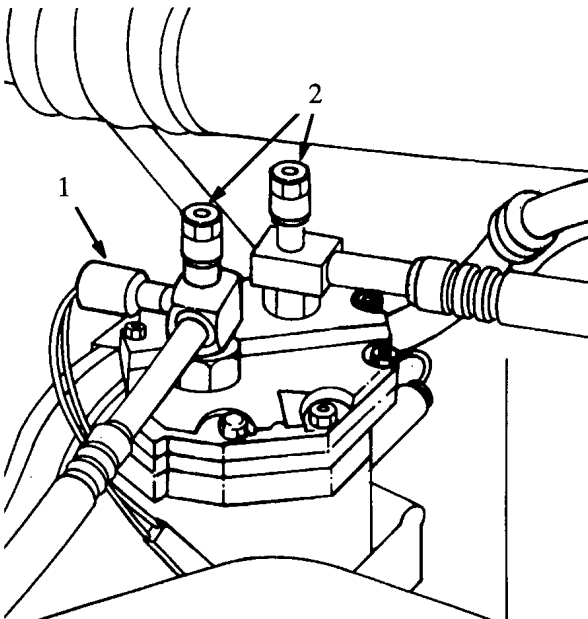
Fan Drive or Shutter Override Switch (Shown on a CCI Compressor)
